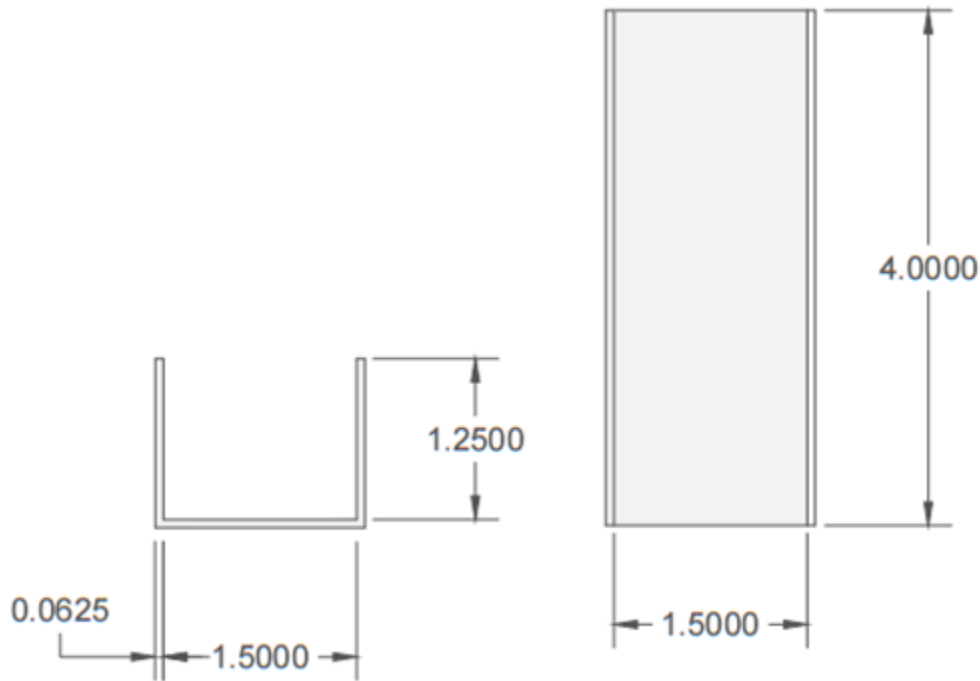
Bracket Dimensions (Produced on AutoCAD, 2015)
